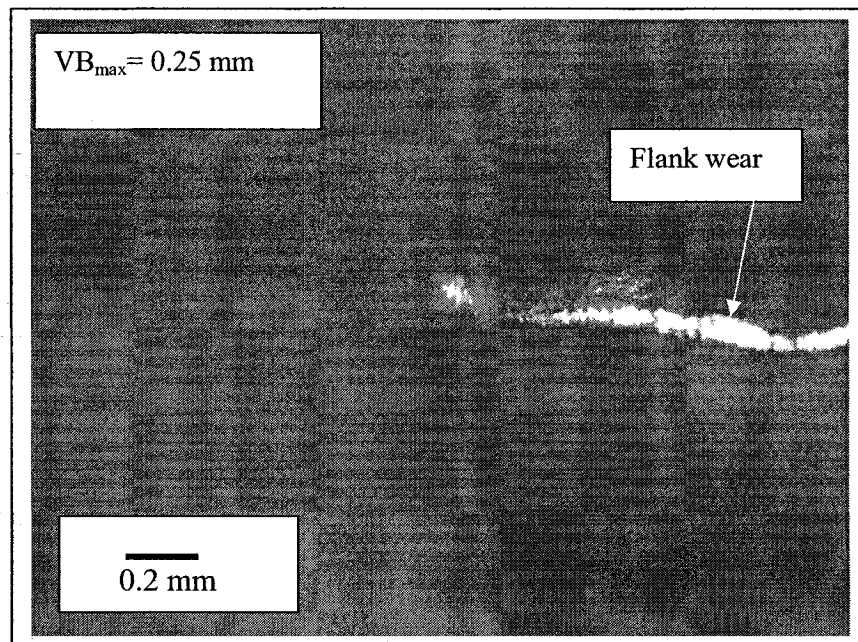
SMM micrograph of wear surface (HM90APKT, coated carbide insert, cutting speed= 70 m/min, feed= 0.025 mm/tooth, wet cutting)
